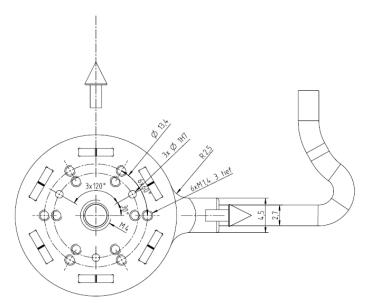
Dimensions of the HEX 21 top and bottom cover as application interface (same bore hole pattern at the top and bottom)
